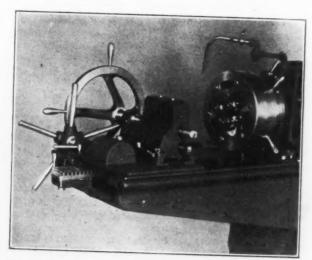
Detail from the Rear, Showing the Vise and Carriage.
